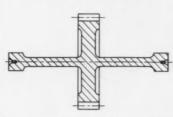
Forged gear design would be easier to process if gear and shaft were separated.
